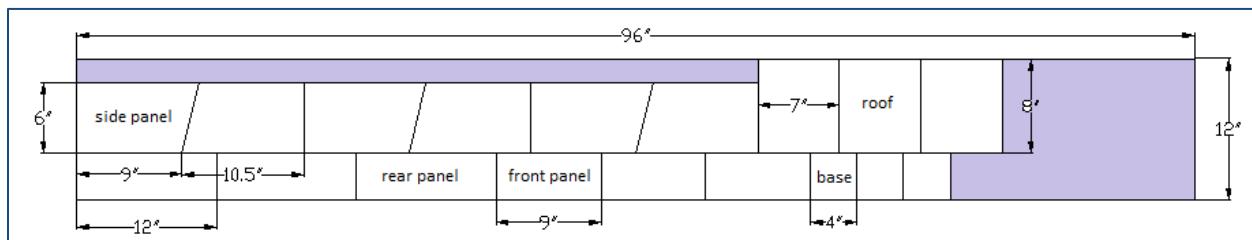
One possible layout of pieces for a 1"x12"x8' rough cut board
